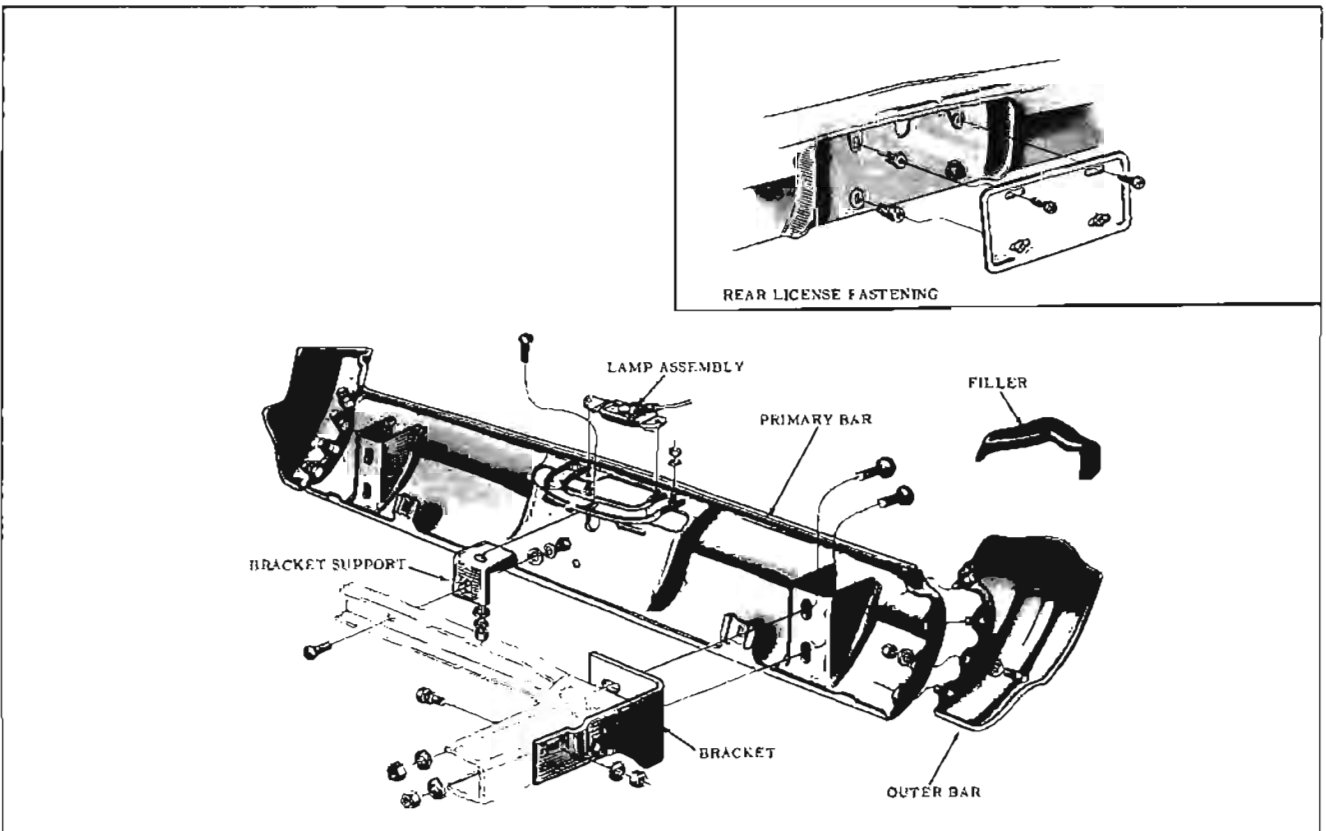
Rear Bumper Assembly (38 & 39 Series)
